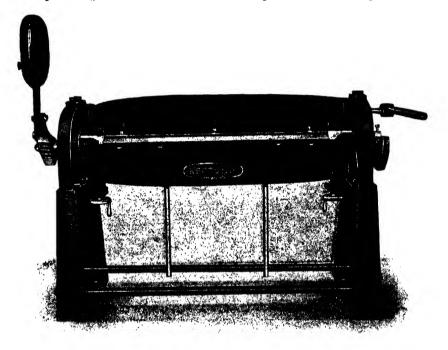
OPEN-ENDED CRAMP FOLDING MACHINE
